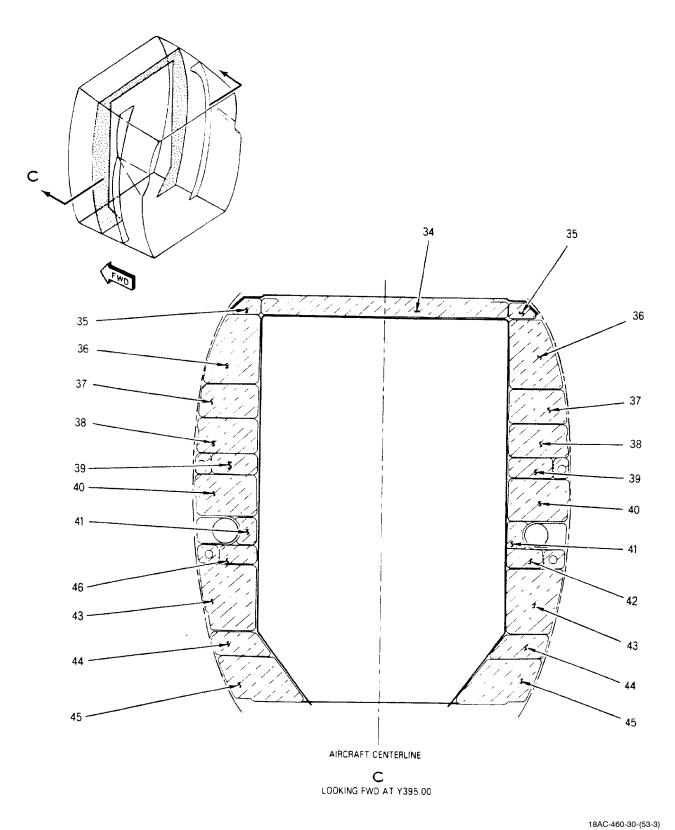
No. 2 Fuel Tank Cavity Foam Filler - 161353 THRU 161741 (Sheet 3)
